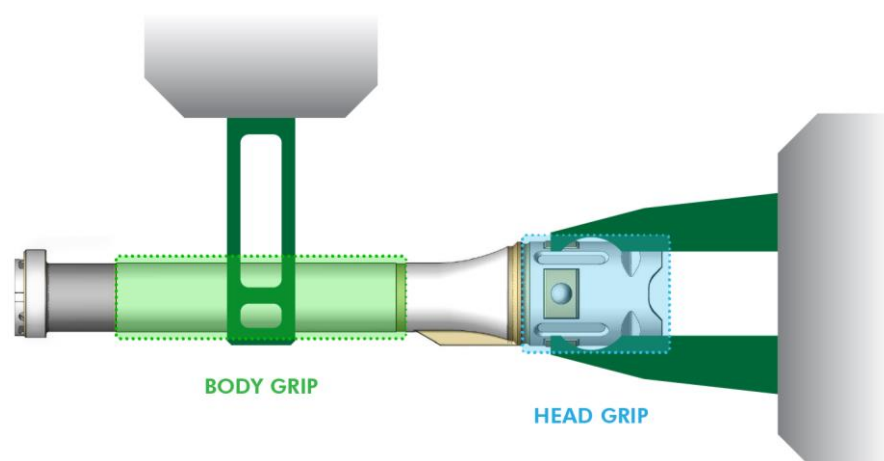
Body grip and head grip areas on the tube (credit for tube image: NASA / JPL-Caltech)
